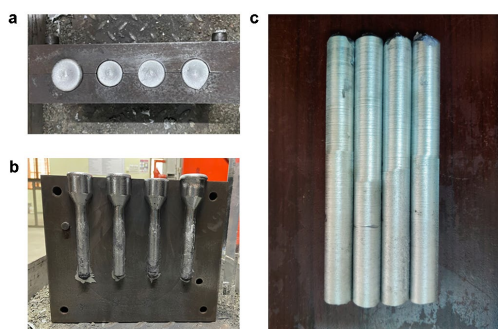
Images of (a) solidification in a metal die (b) cast rods (c) machined rods
